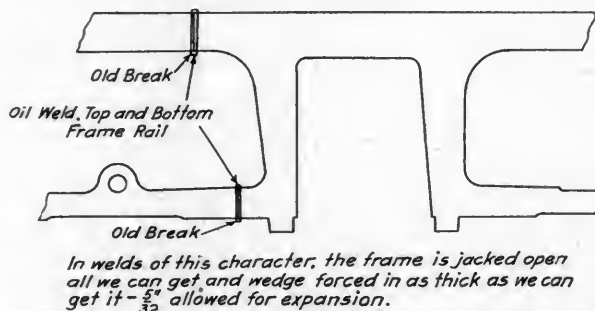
Difficult Oil Weld, Top and Bottom Frame Rails
